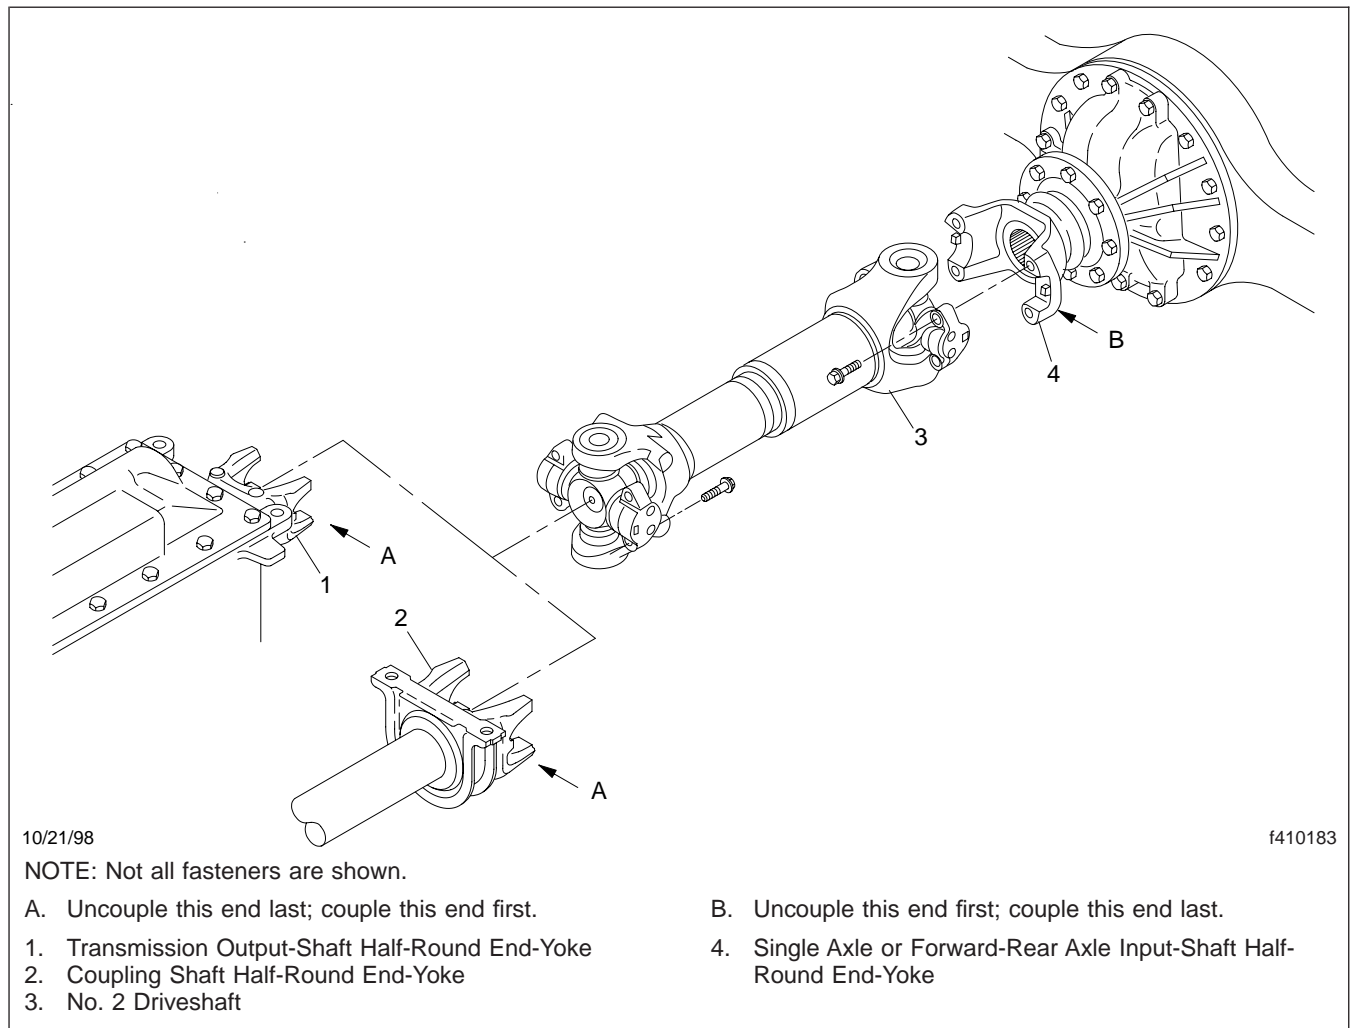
, Removal/Installation of a No. 2 Driveshaft With RPL U-Joints
